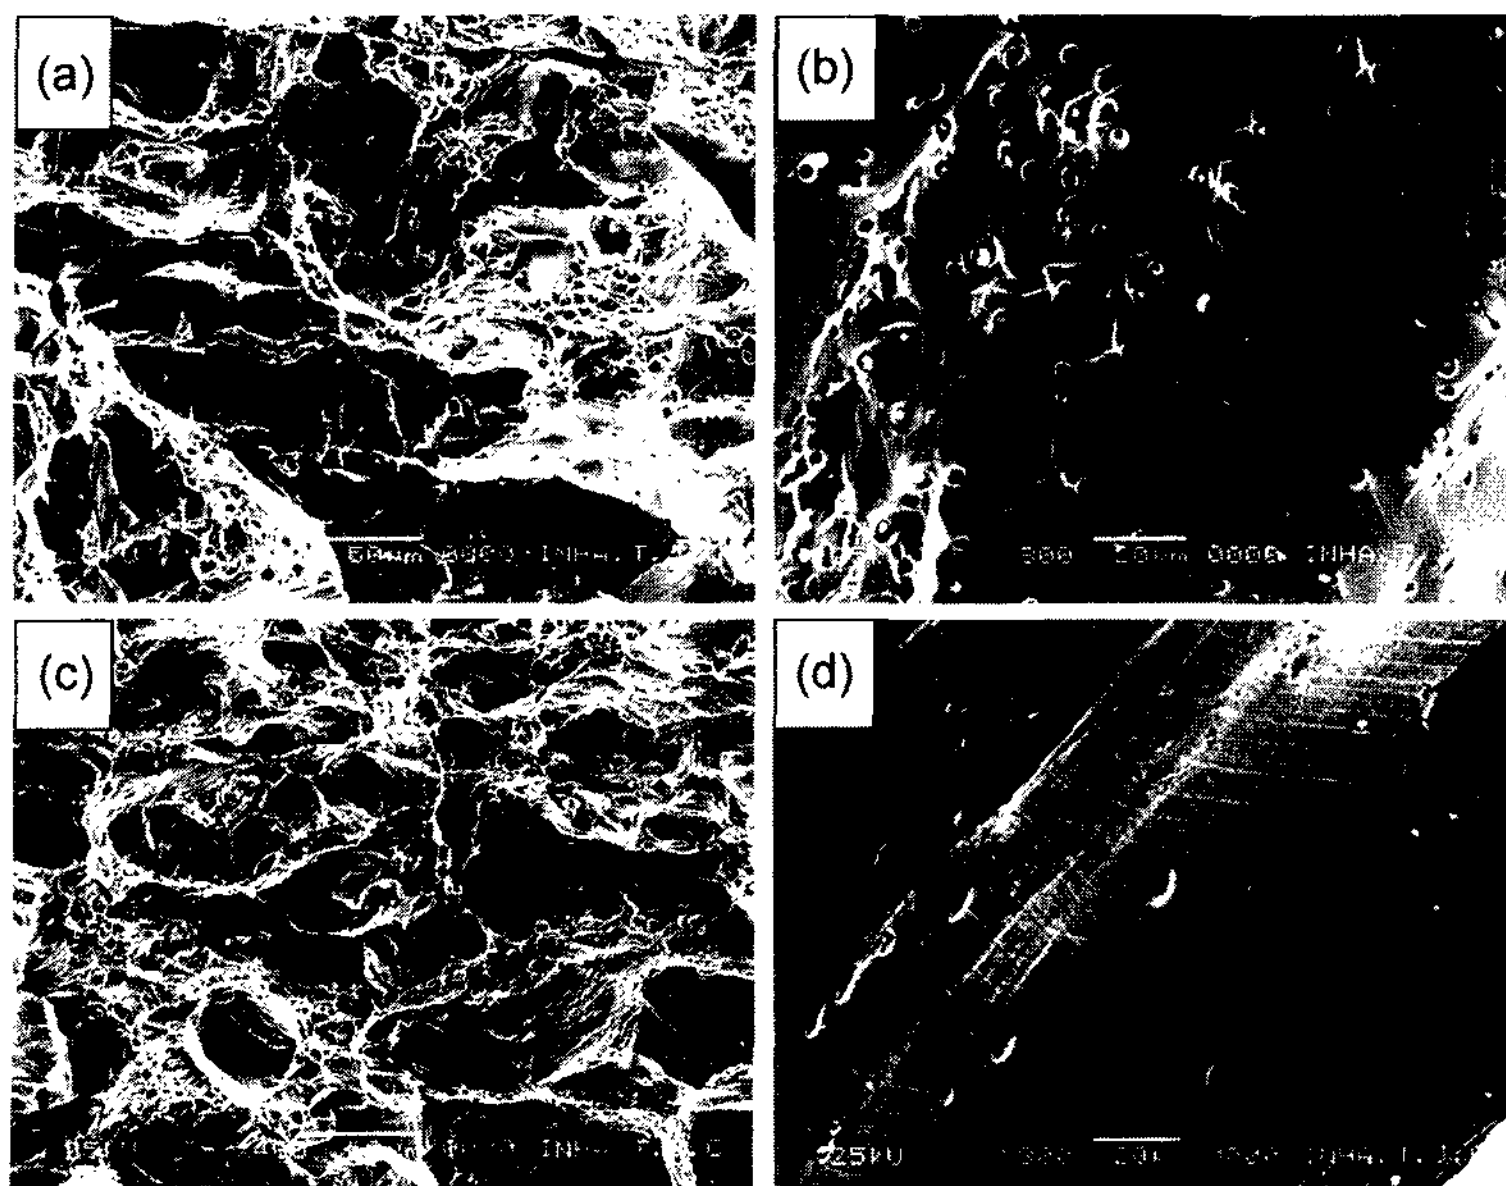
Fractographs of tensile test specimens manufactured by AIM(a, b) and ESR(c, d).
